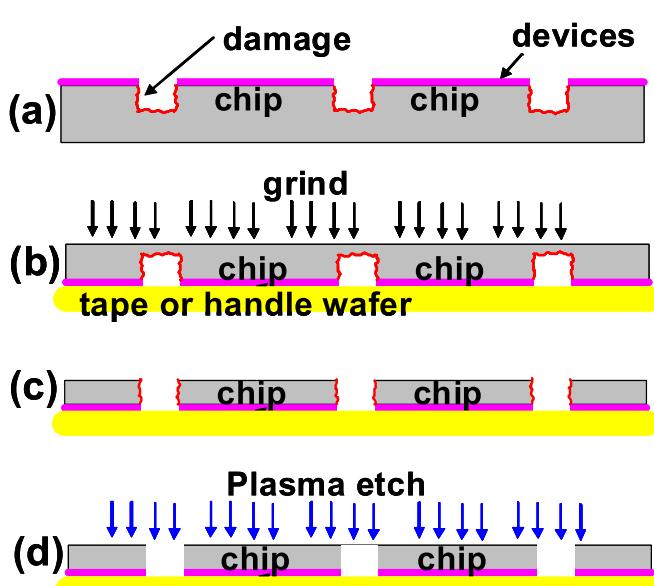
Schematic of dice-before-grind process flow; (a) partial dicing of wafer to depth of final wafer thickness; (b) and (c) mount of tape or handle wafer, then grind until die are separated; (d) etch Si to remove dicing damage [101].
